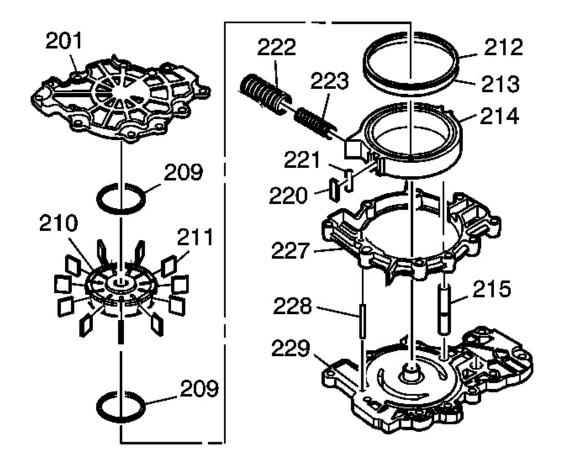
Identifying Oil Pump Components Courtesy of GENERAL MOTORS CORP.
